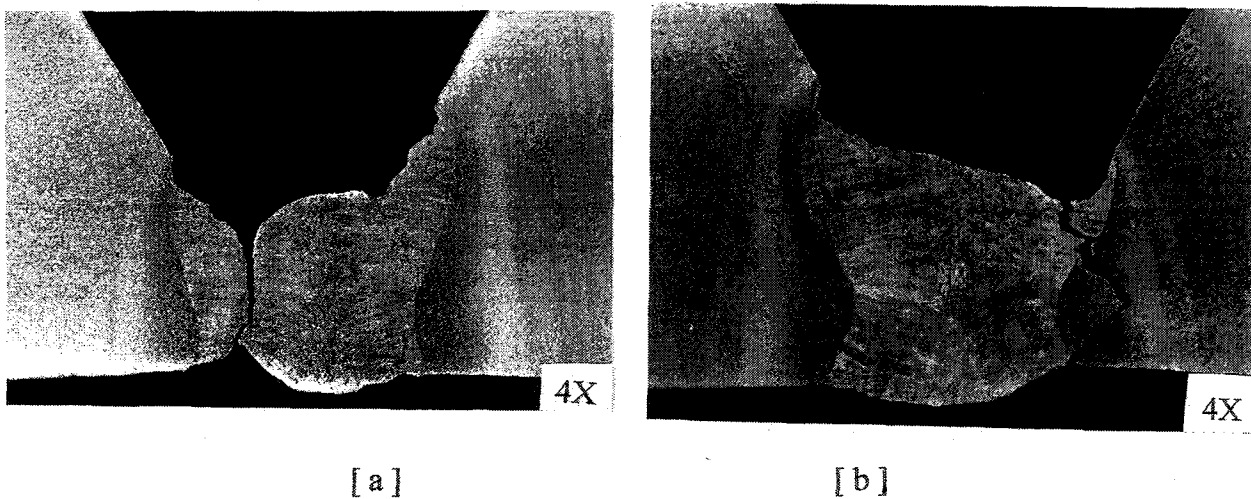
Macrophotographs of weld metal showing uneven bead shape.
